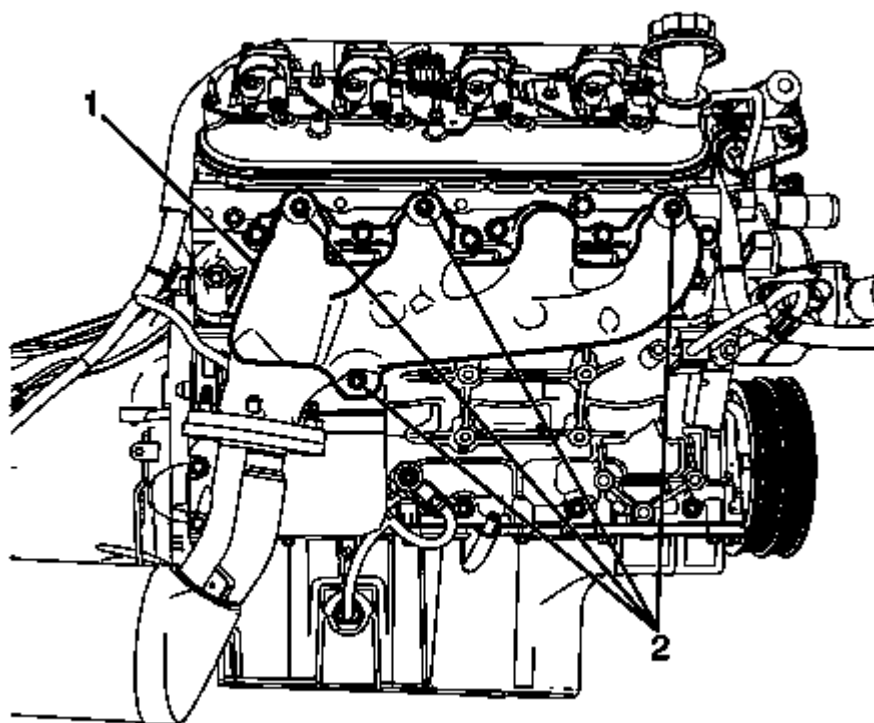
Identifying Right Side Exhaust Manifold Heat Shield To Right Side Exhaust Manifold Retaining Bolts
